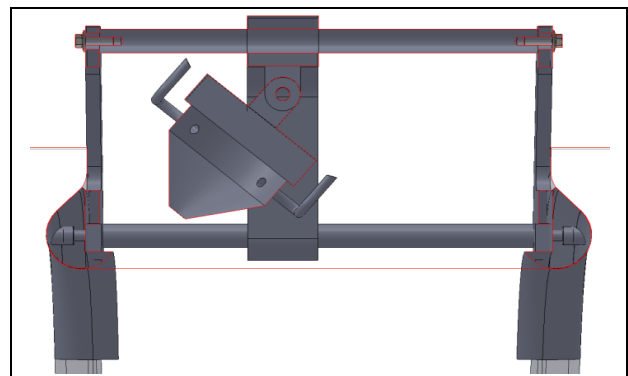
positioning of the prototype of in-situ laser cladding machine
